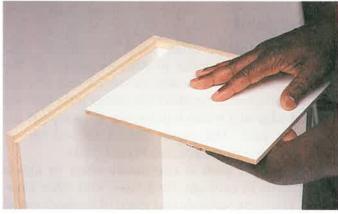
Rabbet joints are often used to hide the back panel edge and end grain.
